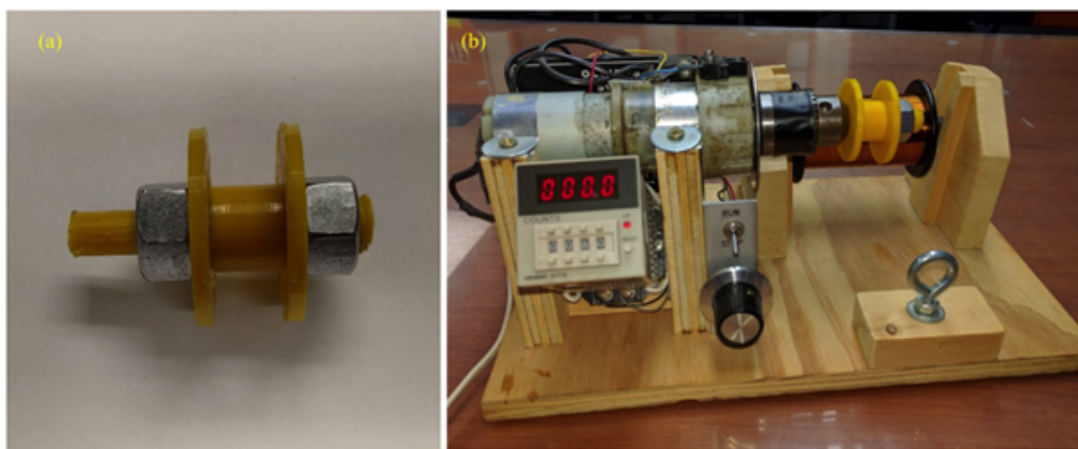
(a) is an example of a 3D printed spool piece and (b) is the winding device with its integrated counter.
